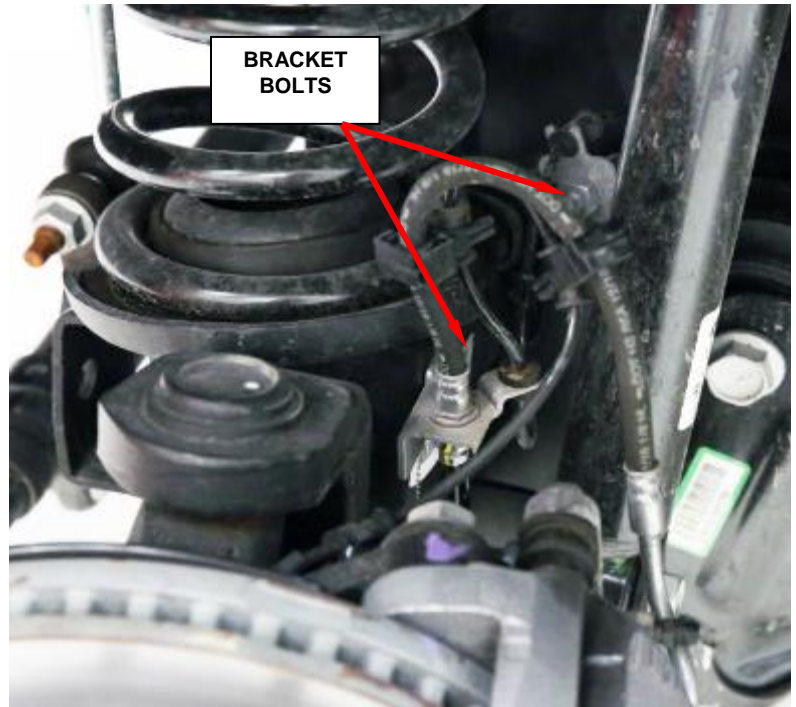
Brake Hose Bracket Bolts (Left Side Shown)
